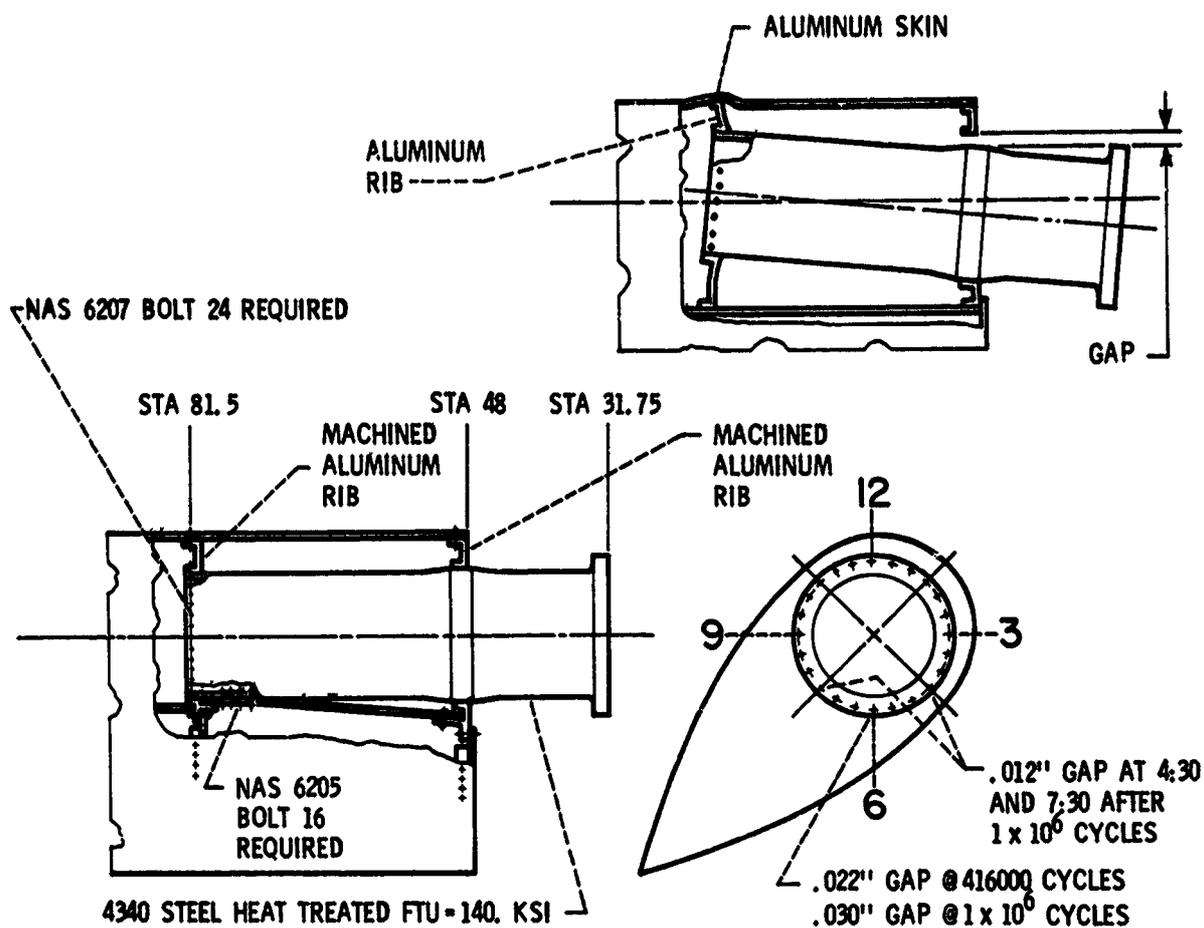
Mod-0 aluminum blade root end details and wear pattern.
